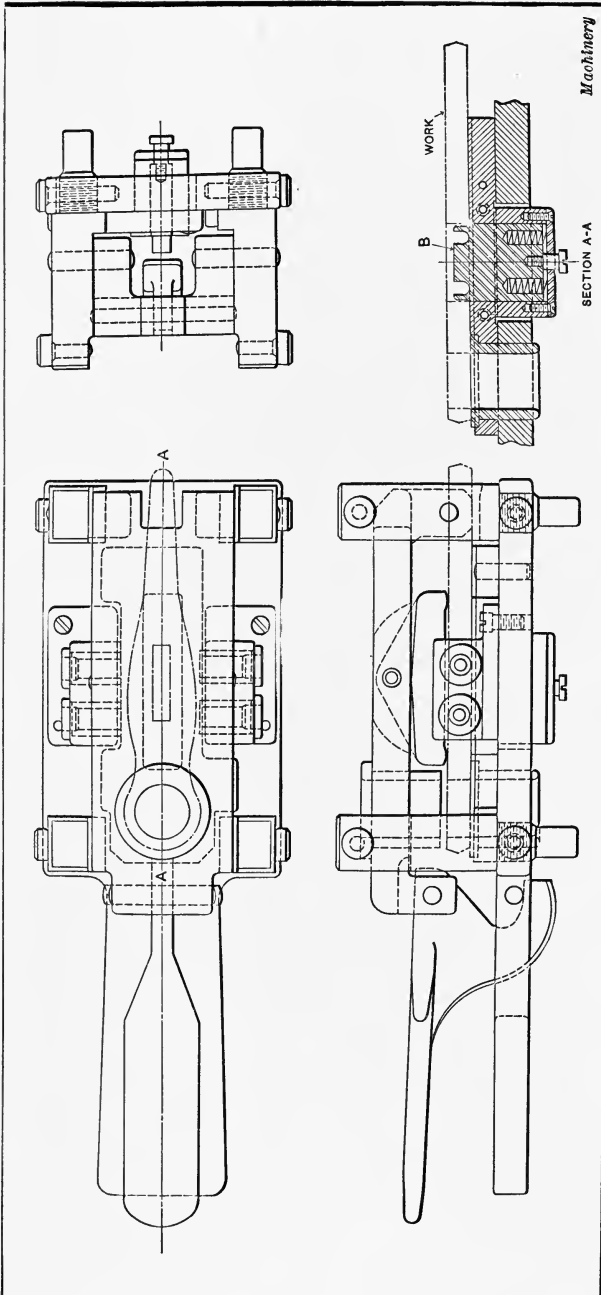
Assembly Drawing of the Jig illustrated in Fig. 10
